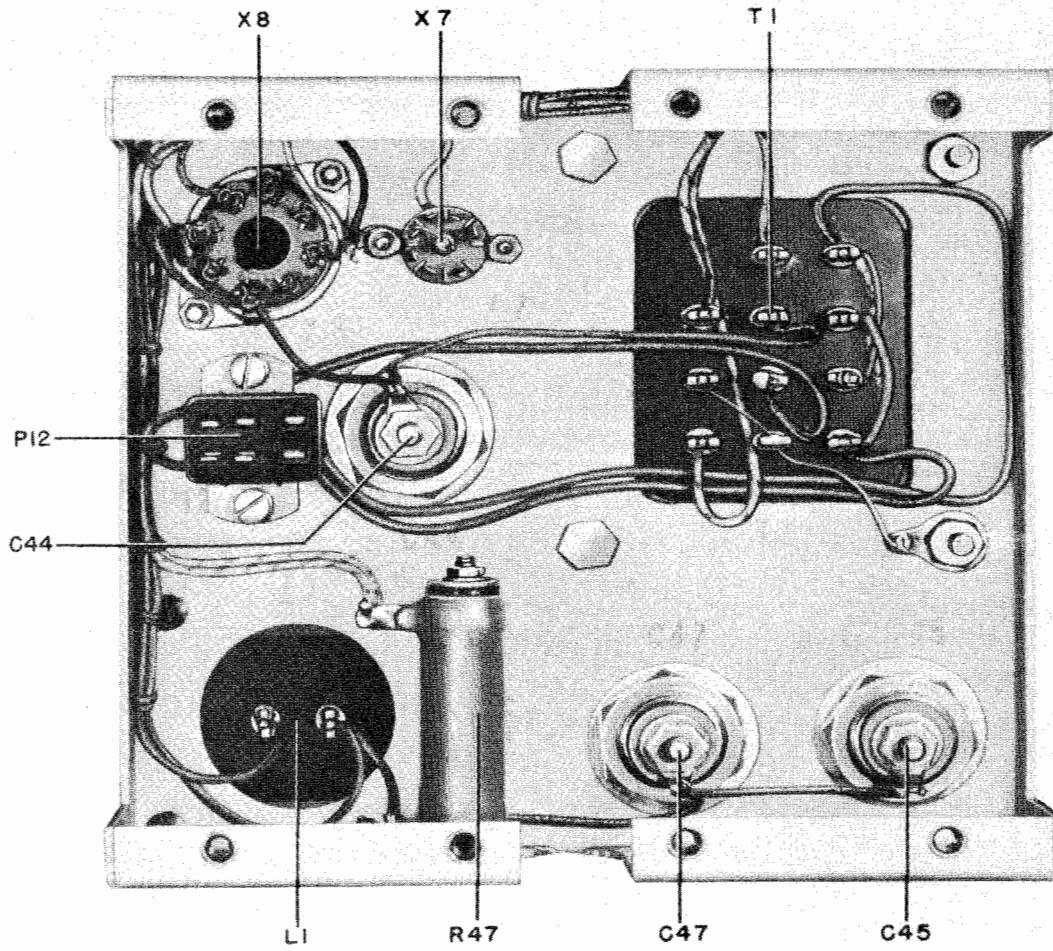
Power Supply Sub-Assembly, Bottom View, Location of Parts
